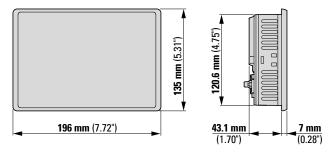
Dimensions for 7.0" front mounting devices in mm (inches)
